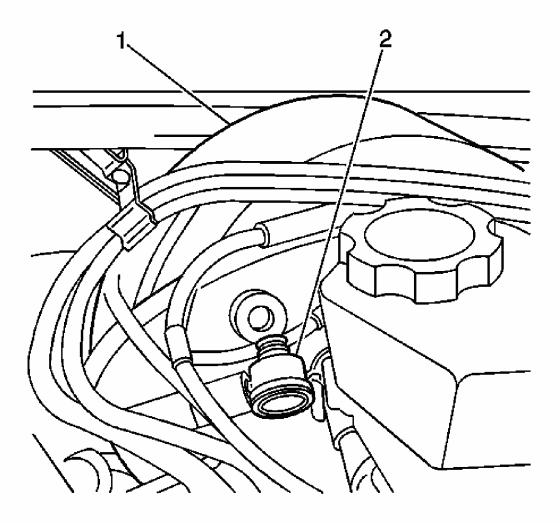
View Of Vacuum Booster & Check Valve Courtesy of GENERAL MOTORS CORP.
